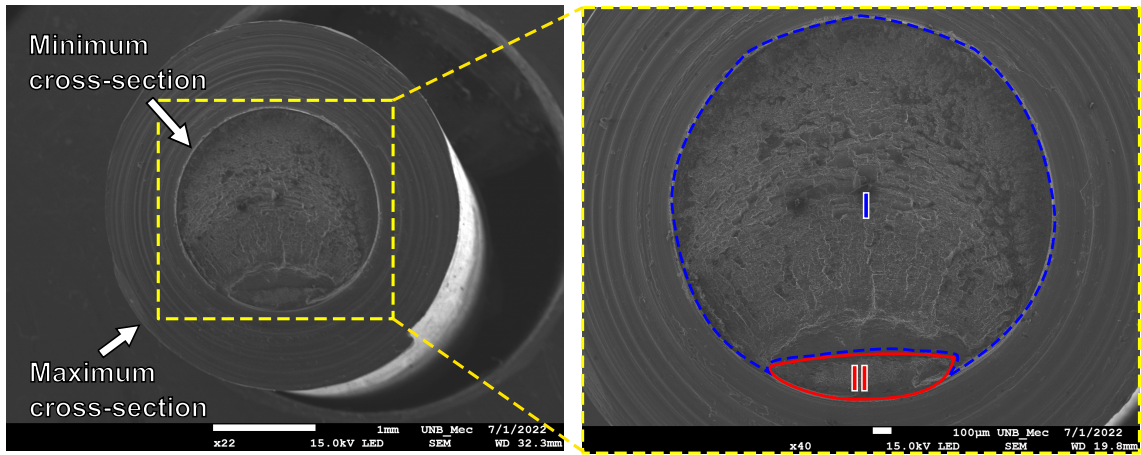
Fracture surface of the V-notched wire specimen V17 (refer to Table 3.2).
